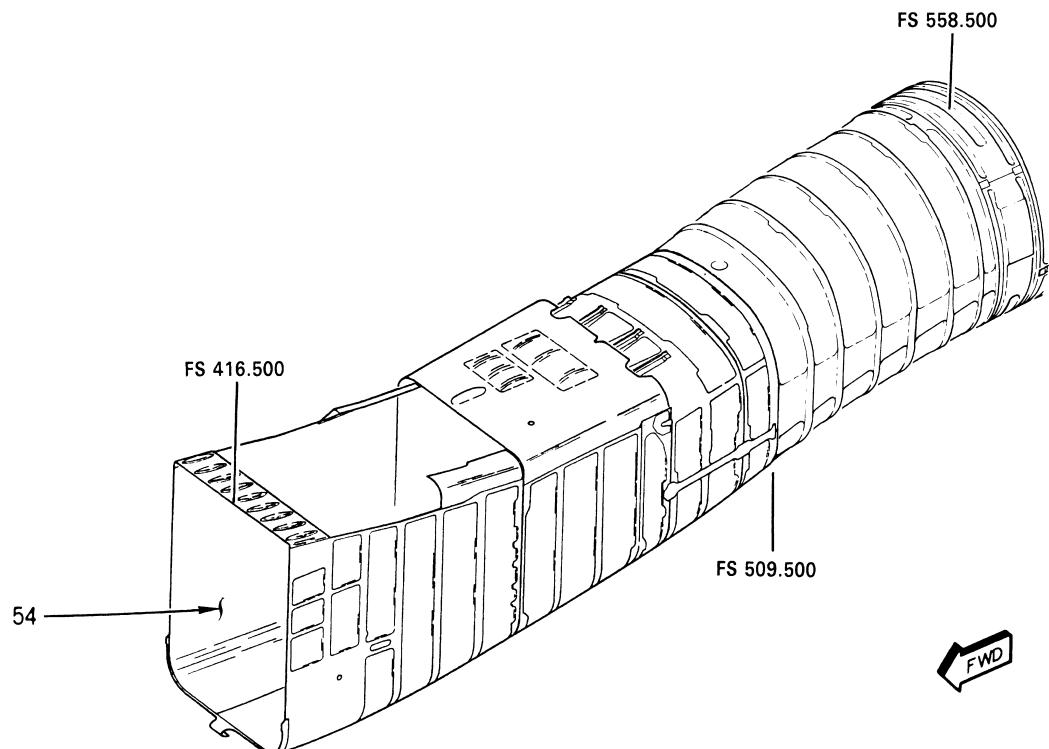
Detailed Visual Inspection (Sheet 5)
